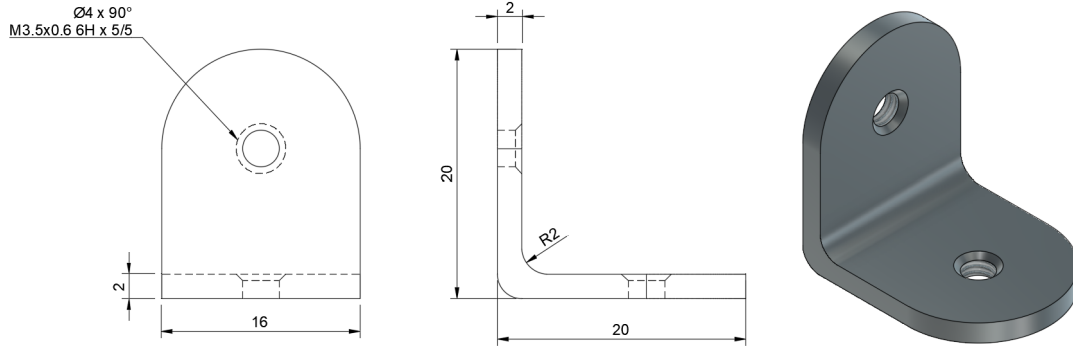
The drawing of L-Bracket without side support (dimension in mm).
